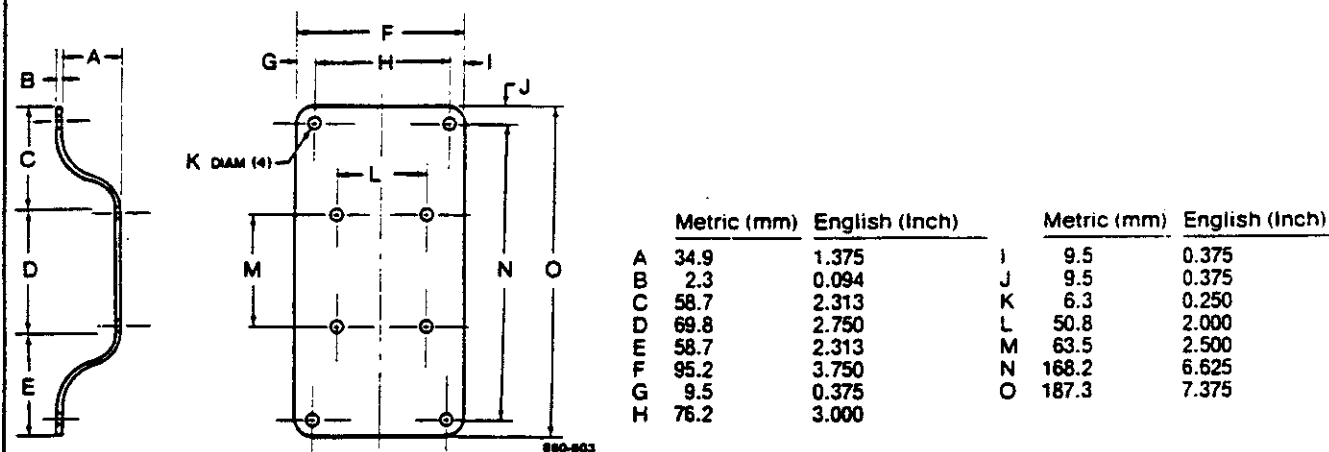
Dimensions - Steel Mounting Plate for Actionator Motors (Part Number 49097)
